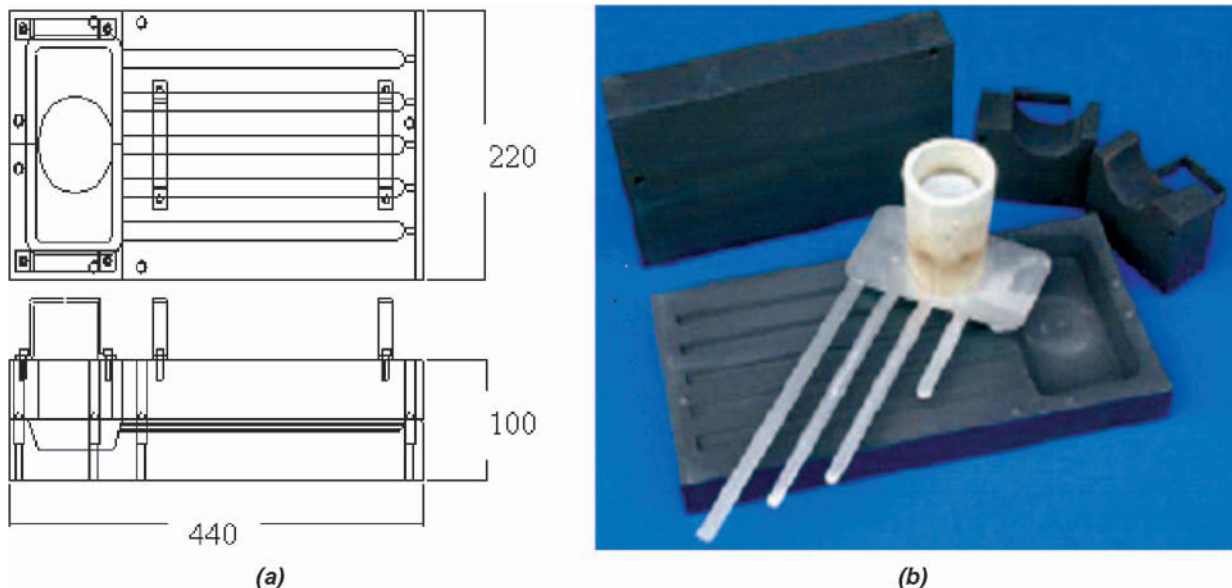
a) Top and side views (all dimensions are in mm) of the strip mould<sup>(11)</sup>; open mould and casting specimen.
